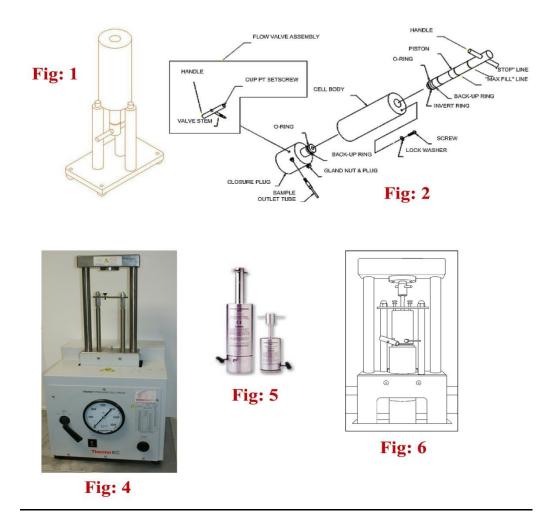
Exploded diagram of the 40K manual-fill assembly.
